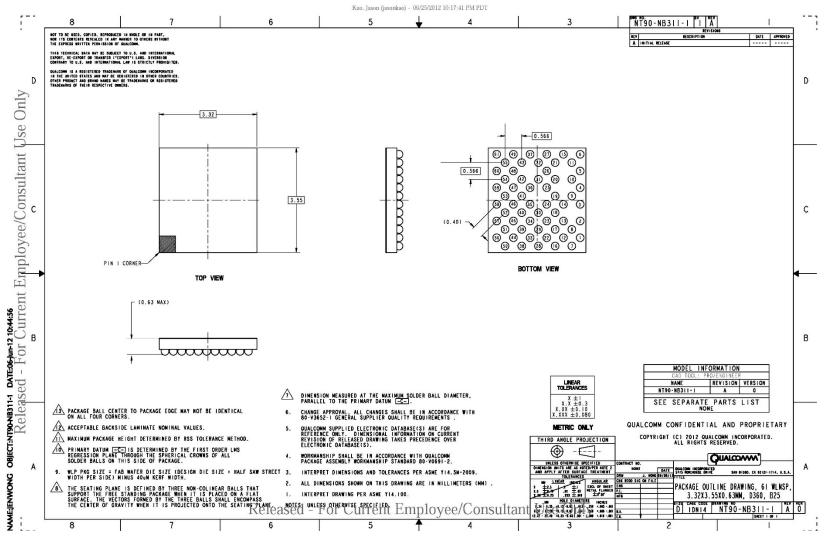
61WLNSP (3.32 × 3.55 × 0.63 mm) package outline drawing
